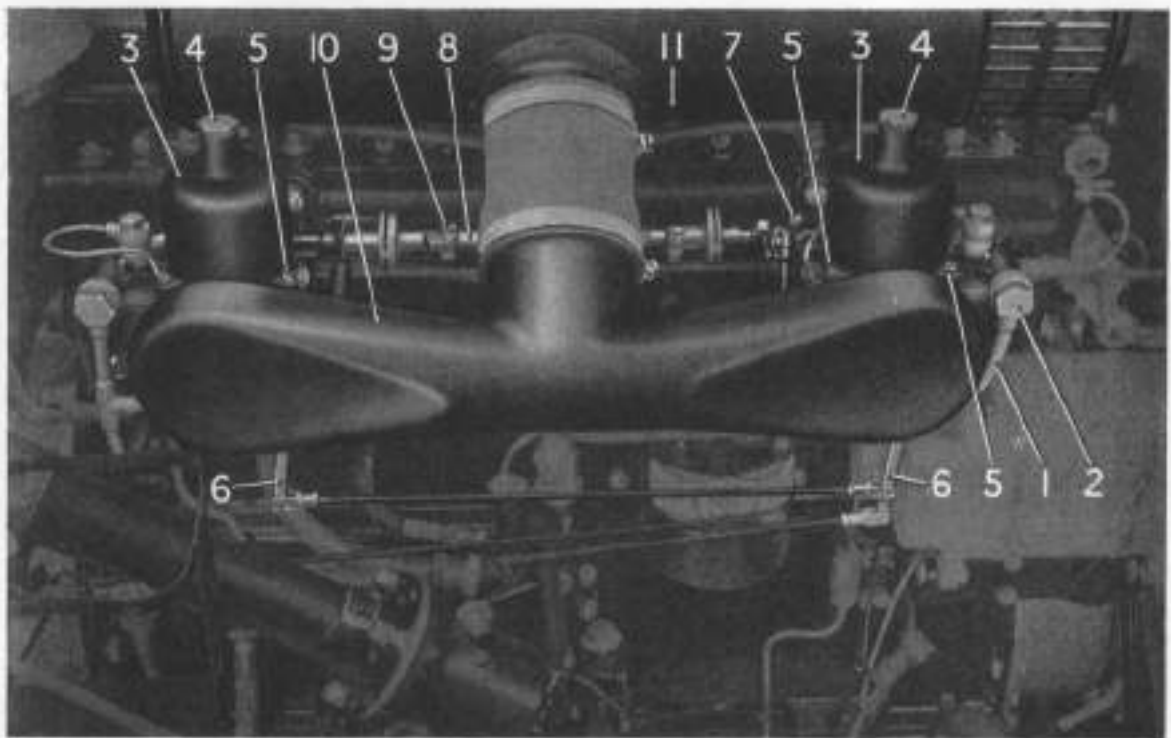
CARBURETTERS IN POSITION ON ENGINE
